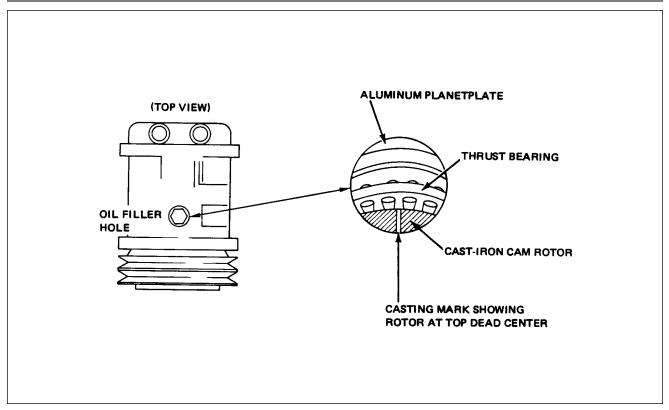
Top Dead Center Casting Mark (Sankyo Compressor)
